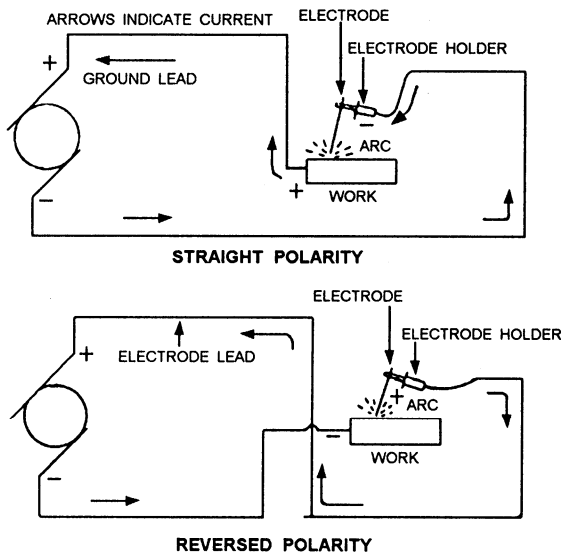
Straight and reverse polarity in electric welding.
